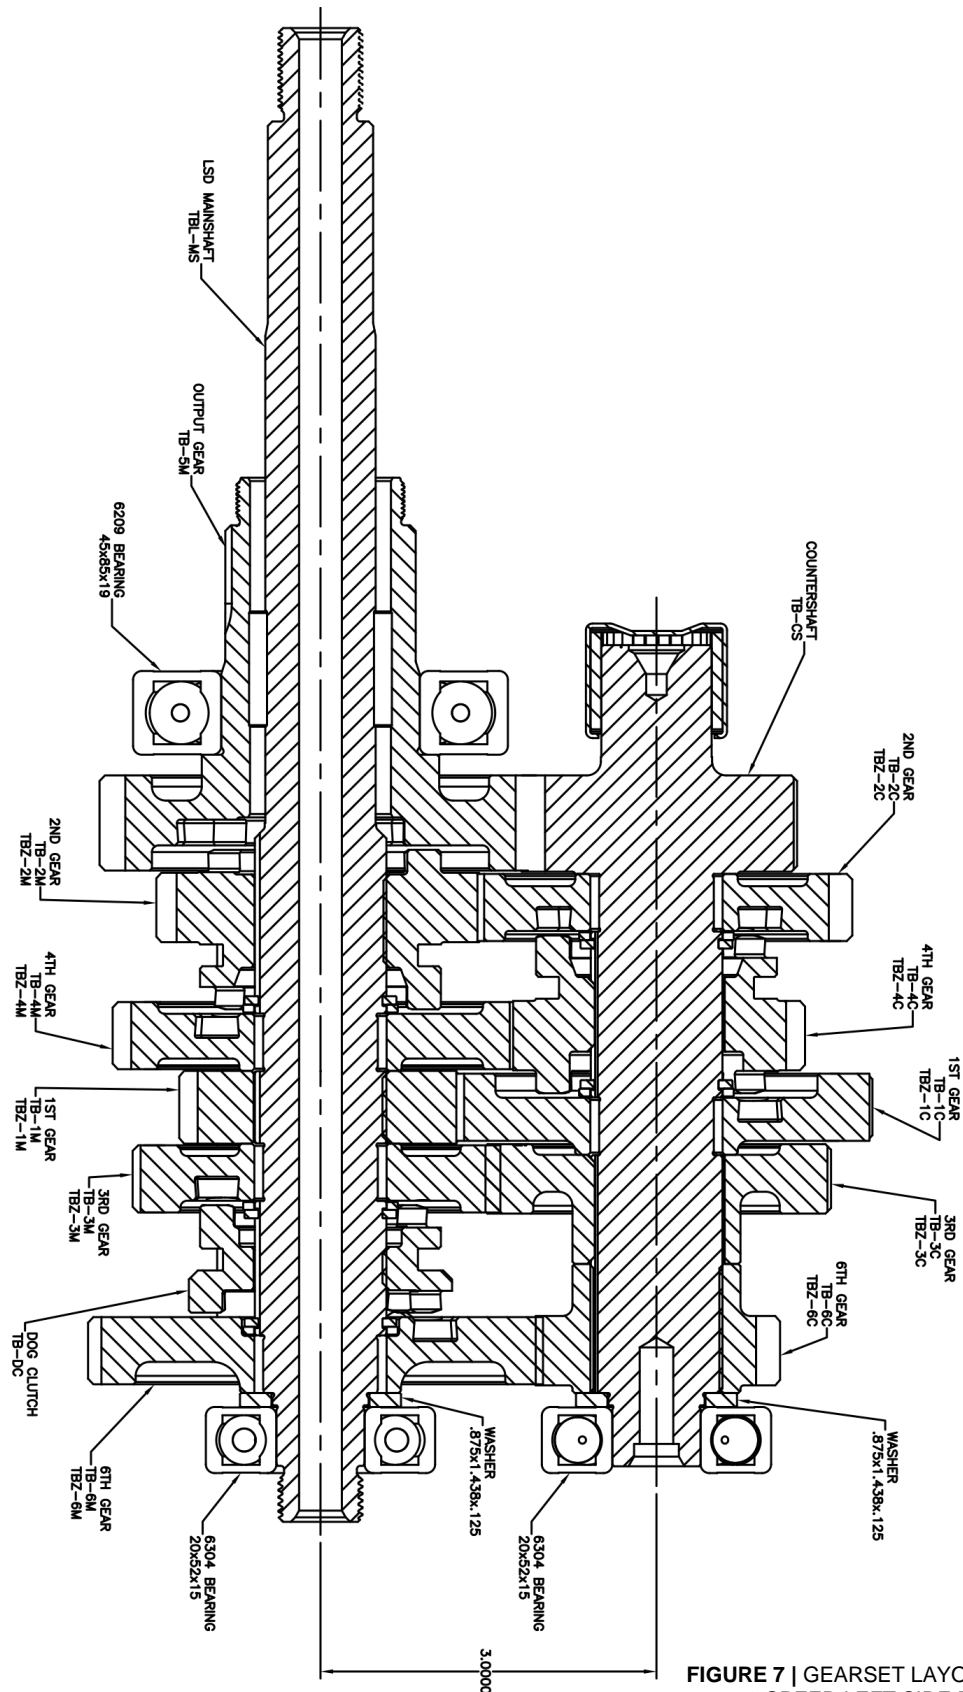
| GEARSET LAYOUT, TORQUEBOX 6-SPEED LEFT SIDE DRIVE (LSD)
